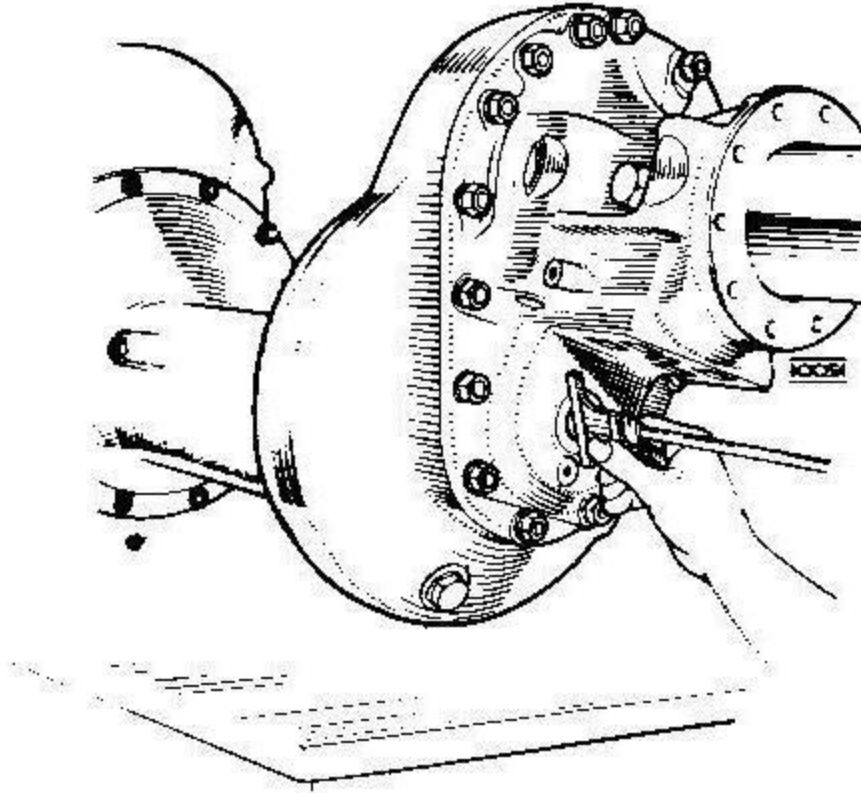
Measuring the depth of the axle shaft from the right-hand thrust button face
